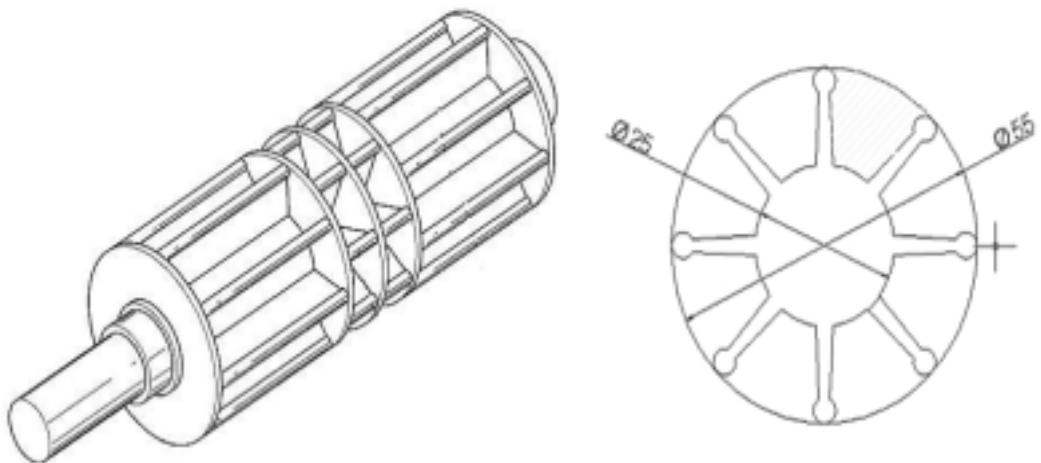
Schematic of roller and view of cross section(Unit : mm)
